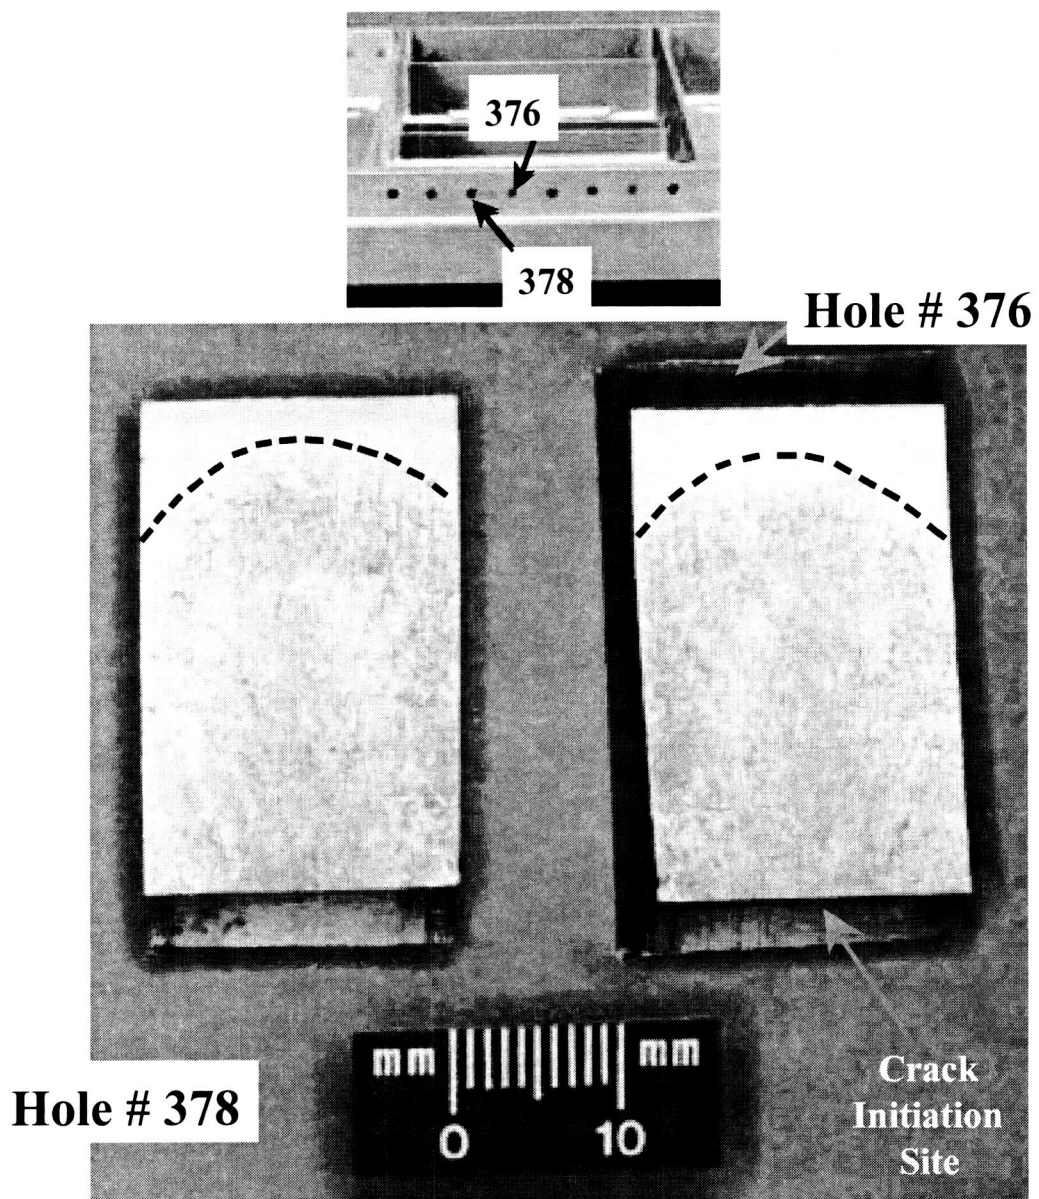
The photograph shows both surfaces of the crack emanating from fastener hole #378. The location of fastener holes #378 and #376 is shown in the small photograph.
